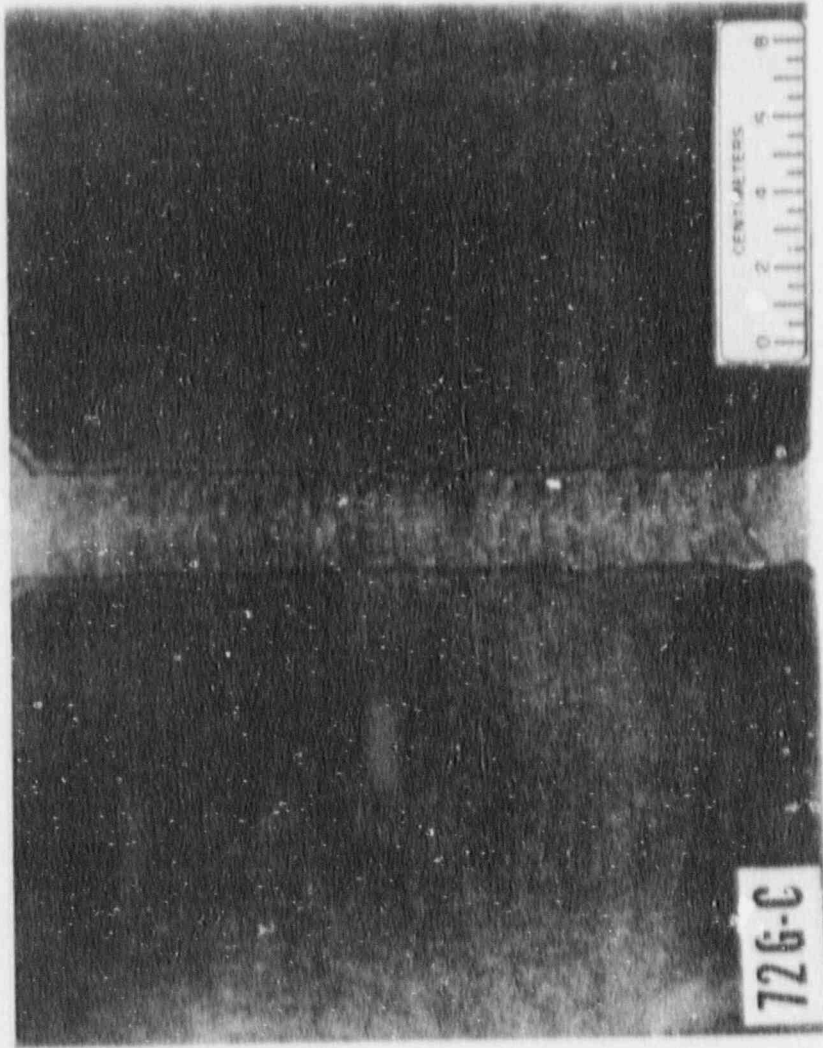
Cross section of typical submerged-arc weld used in the 72W and 73W welds used in the Fifth and Sixth Irradiation Series.
